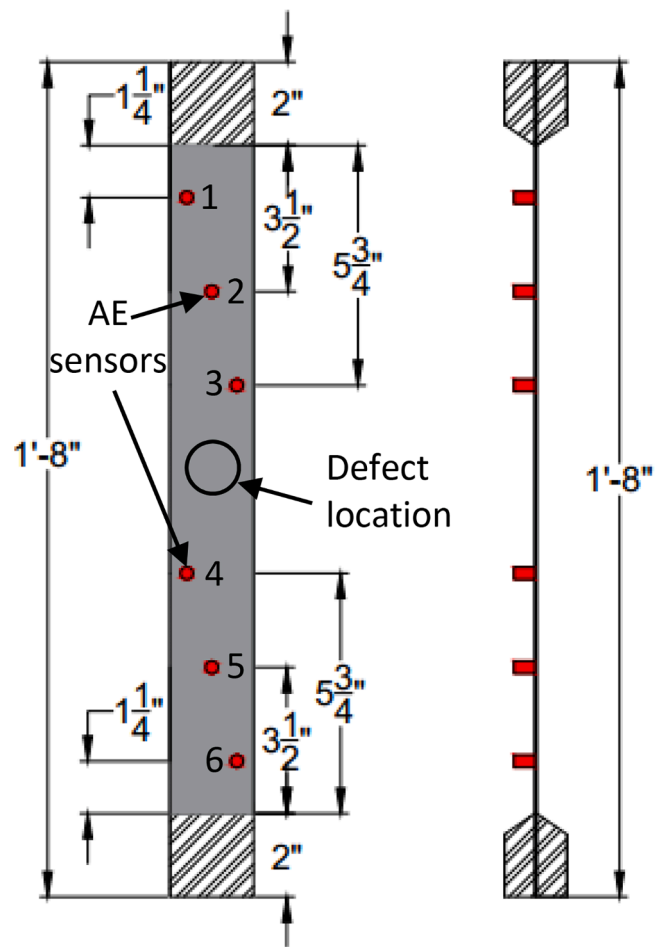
Tensile Specimen Geometry and AE Sensor Layout.
